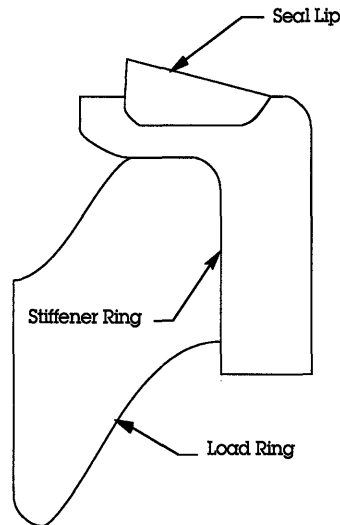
Each D10 seal assembly is made up of the load ring (which is detachable), the stiffener ring, and the seal lip.
